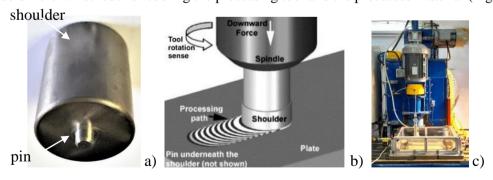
a) Processing tool [10]; b) Schematic presentation of FSP processing [3]; c) Processing equipment, equipped with a liquid processing module [10]
